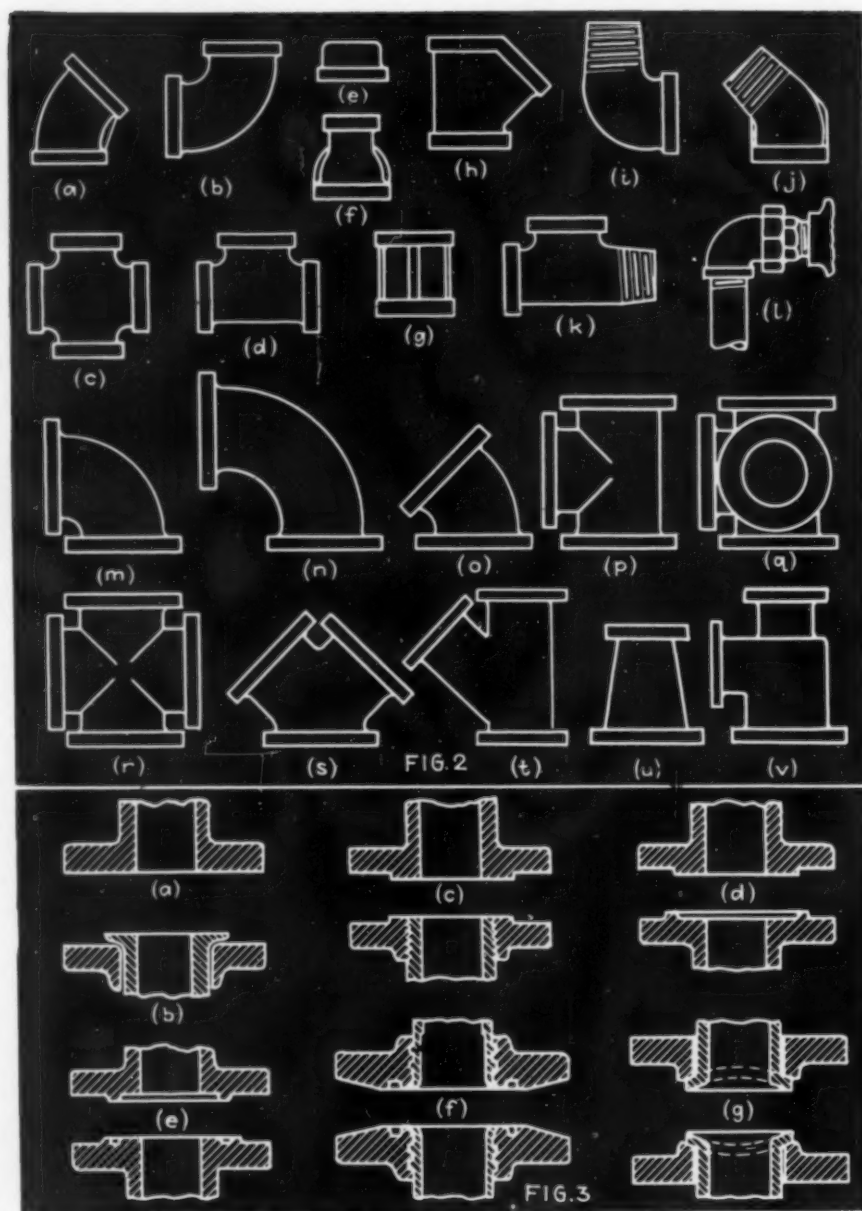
(a)-(l), Typical screwed fittings; (m)-(v), typical cast iron flanged fittings
